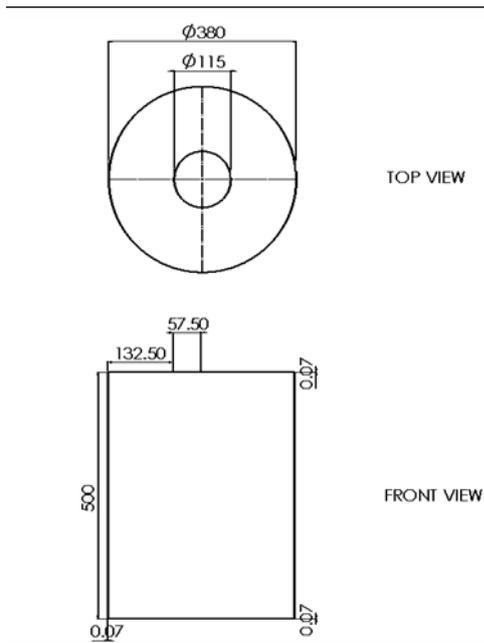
Biochar kiln (dimension displayed in millimeters)
